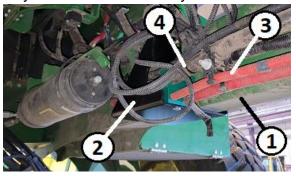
Frame Rail Bracket Installed Key 1 – RH Frame Rail Key 2 – Bracket Key 3 – Battery Cable Key 4 – Coolant
